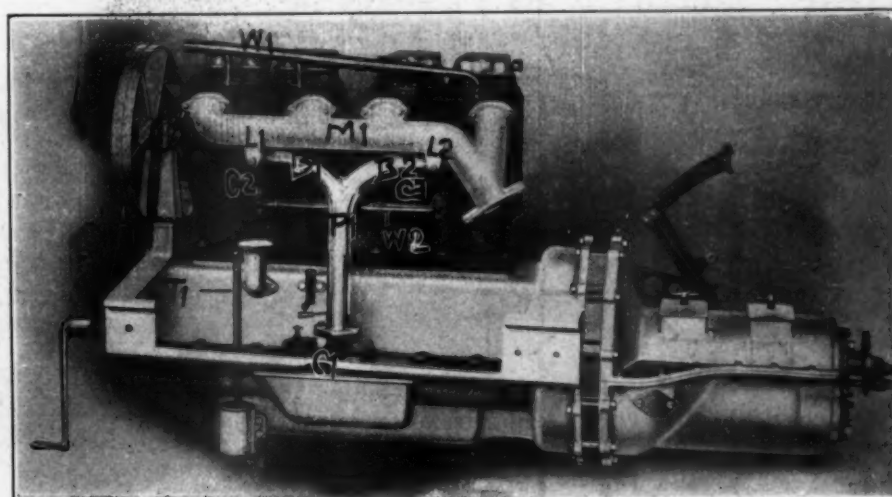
Inlet and exhaust side of motor, also showing oil gauge
